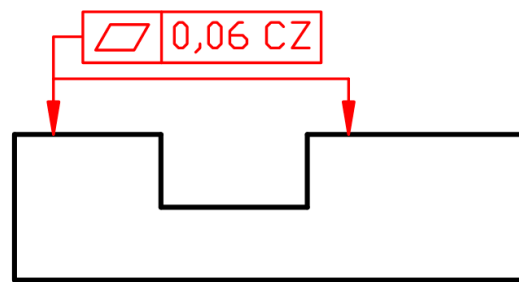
The flatness tolerance with the CZ modifier: two tolerated surfaces shall be considered together—widely used but not fully defining specification.
